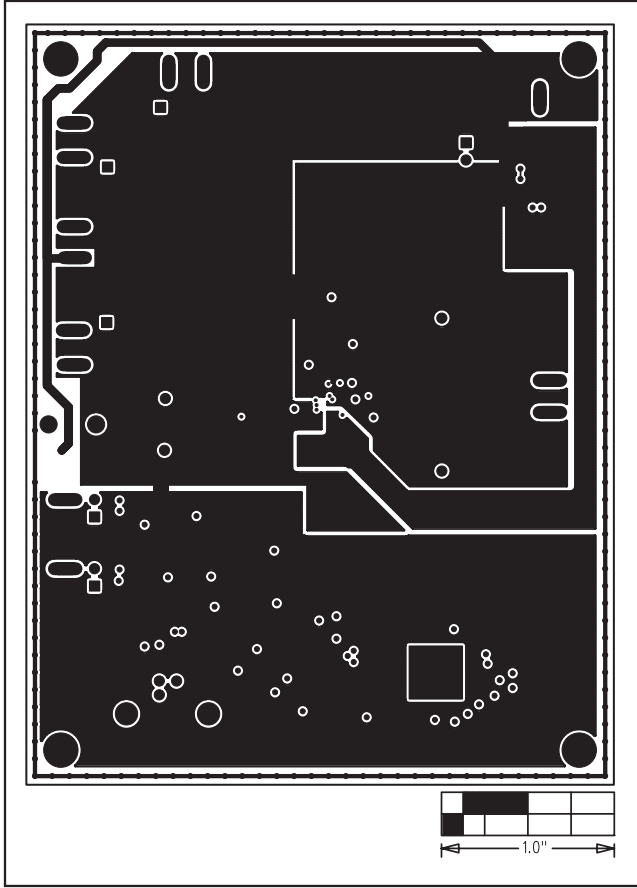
MAX9796 EV Kit PCB Layout—Layer 2 (GND)
